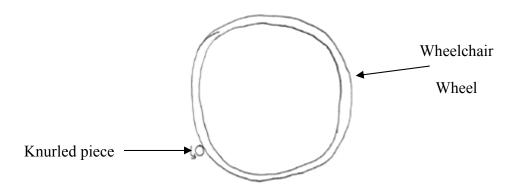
Side View of Contact Between Motor Shaft and Wheel of Design C
